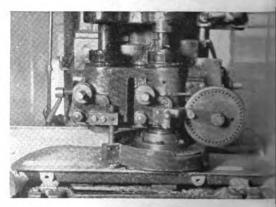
Taper attachment used on a Bullard vertical boring mill to machine tapers on extractor baskets.
